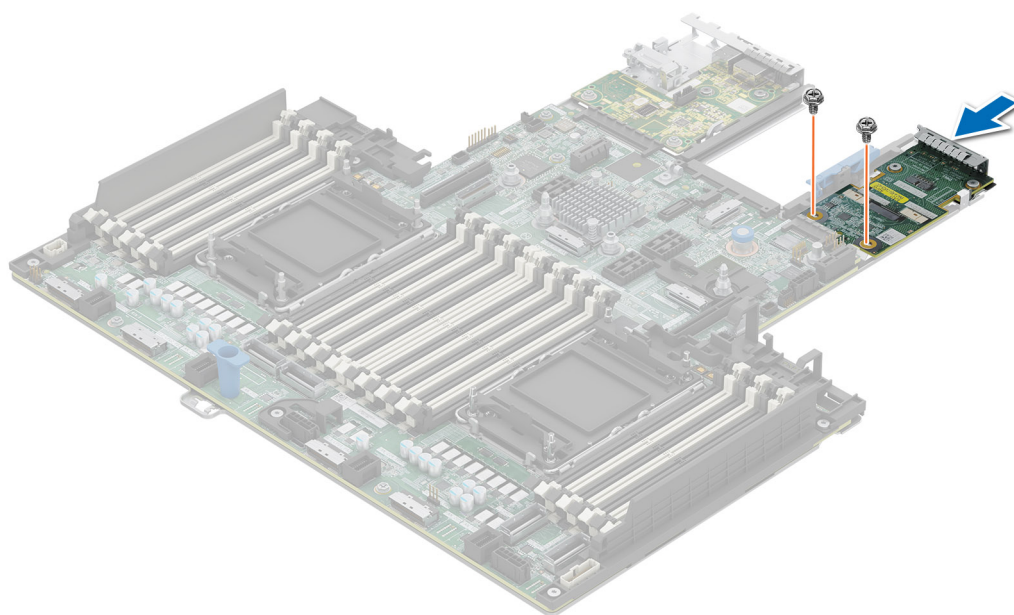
Installing the LOM card and Liquid cooling rear I/O board
